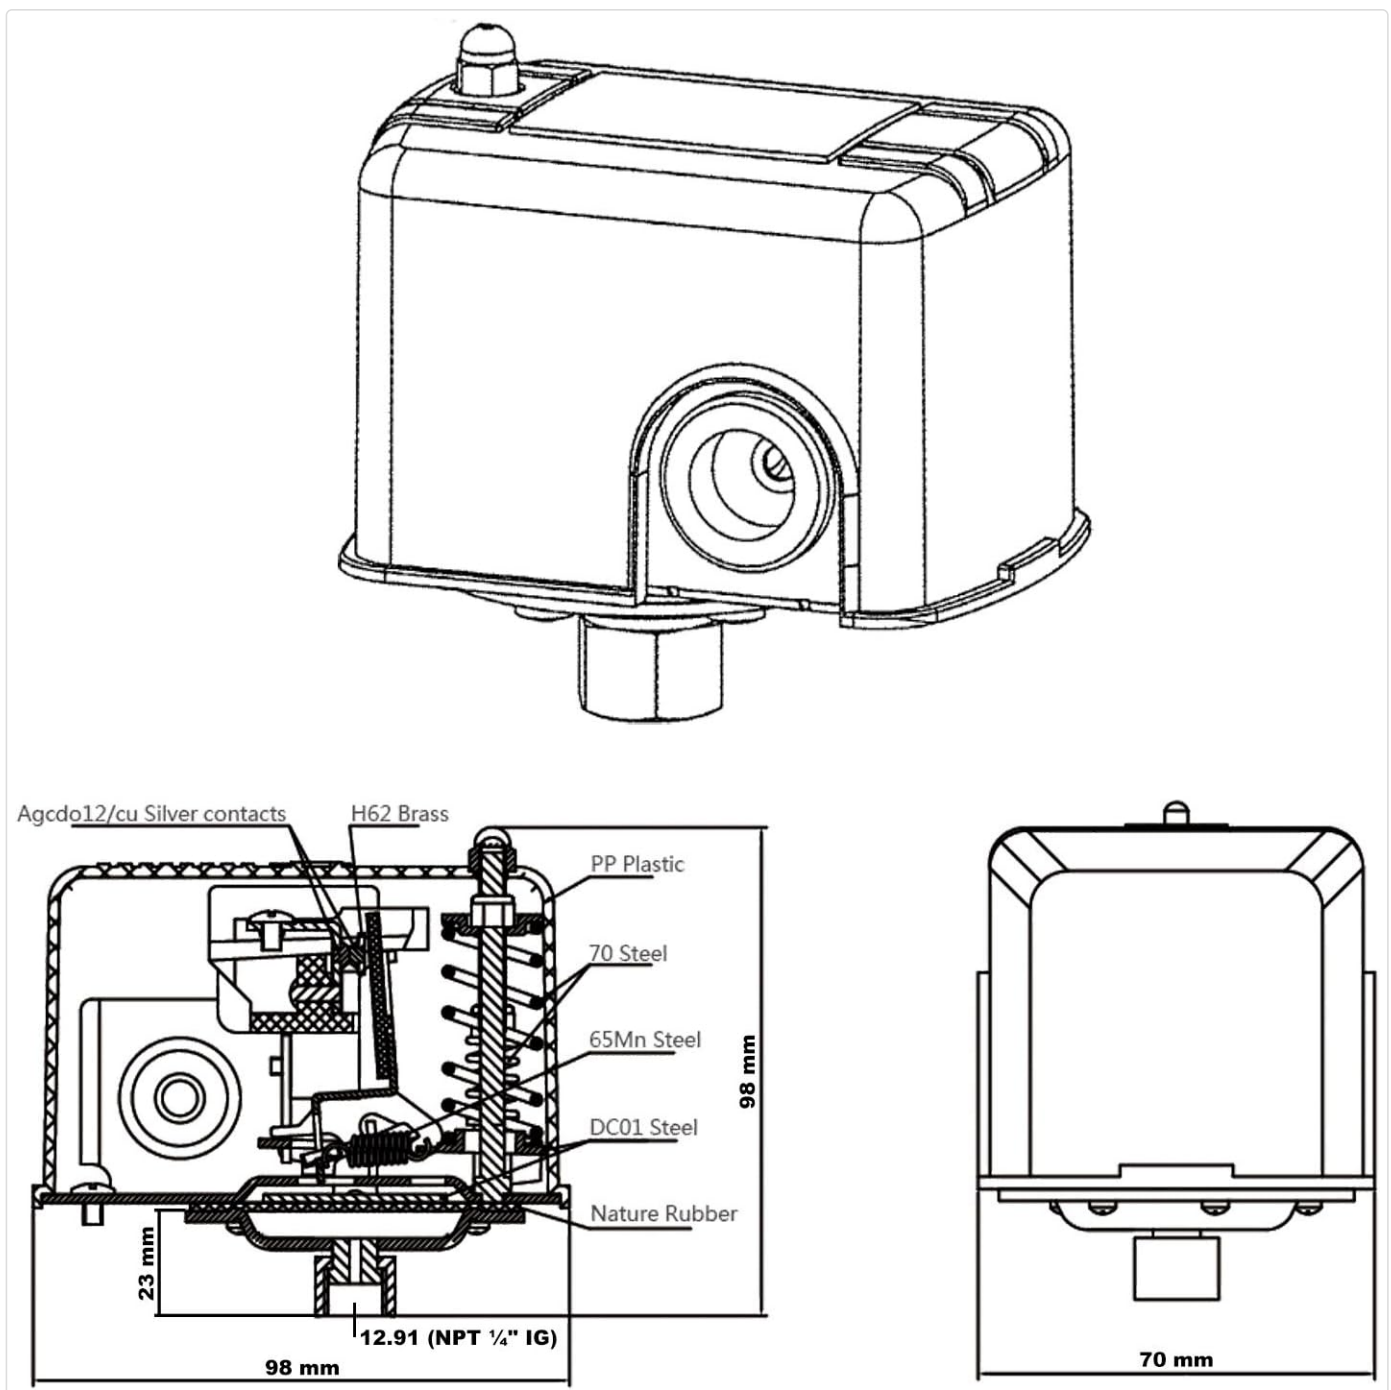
Detailed technical drawing showing overall dimensions (98mm x 70mm x 98mm) and internal material components such as PP Plastic, Steel, Brass, and Nature Rubber.
